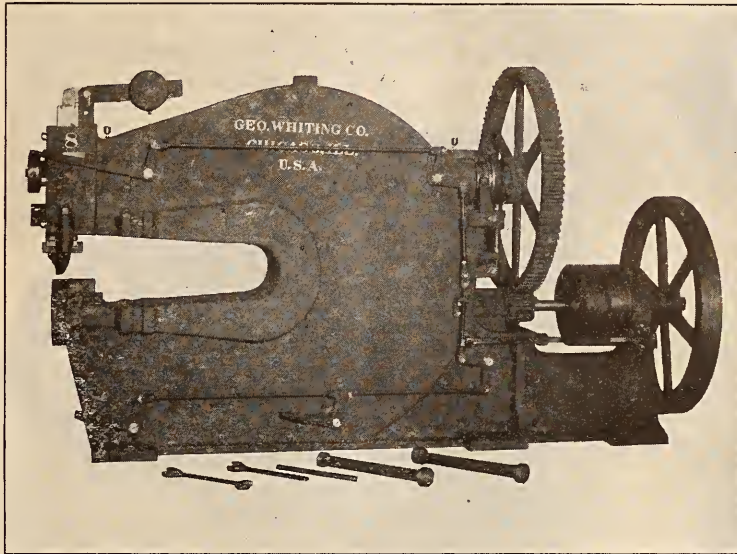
BOILERMAKERS' COMBINED PUNCH AND SHEAR, GEO. WHITING CO.
